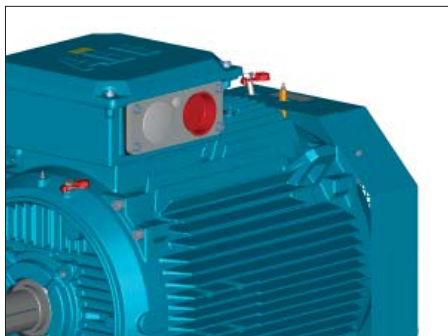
Terminal box for motor sizes 160 – 250. Connection flange with tapped cable entries.
